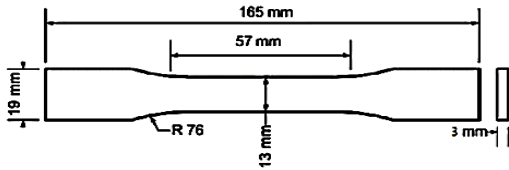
Tensile Testing Specimen as per ASTM D638 Standards
